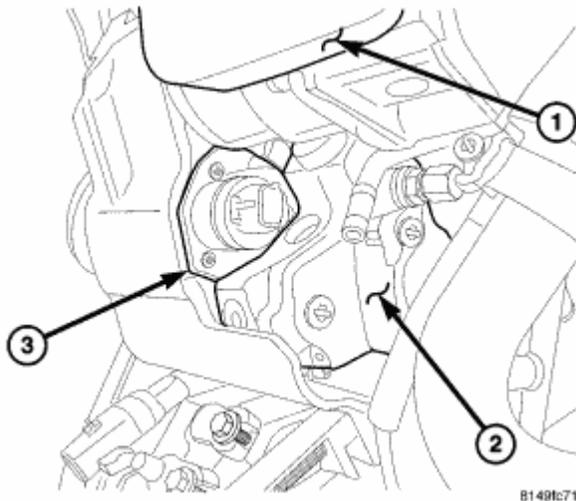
Fuel Quantity Solenoid, Air Control Valve & Supply Pump
